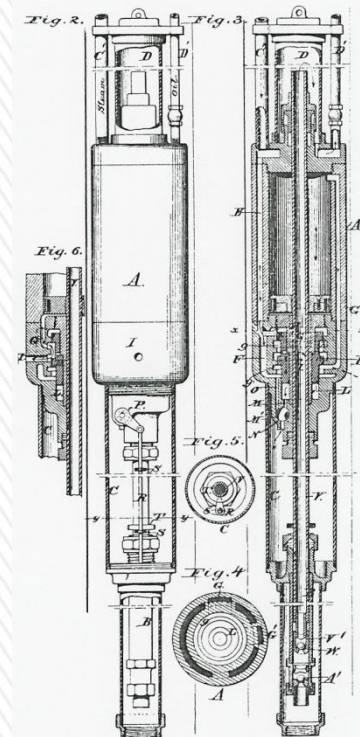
H. W. Faucett Bottom Hole Steam Pump.
